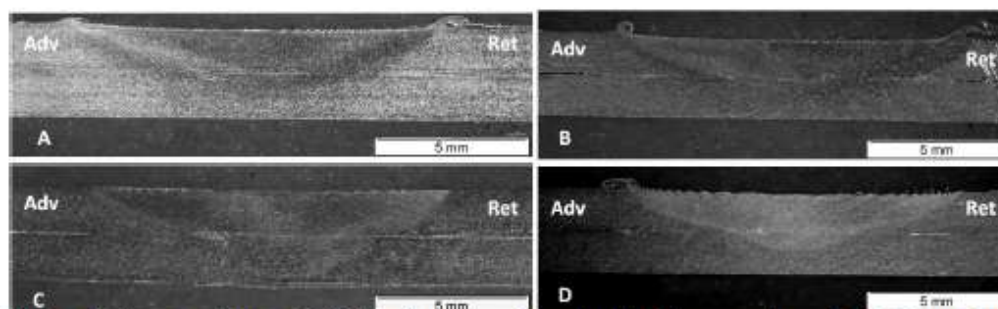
Cross-sections of FSW lap joints performed with (A) a non-threaded - 1,5 mm long probe tool at 1500 rpm – 150 mm/min; (B) a threaded - 1,5 mm long probe tool at 1500 rpm – 150 mm/min; (C) a non-threaded - 2 mm long probe tool at 750 rpm – 300 mm/min; and (D) a threaded - 2 mm long probe tool at 750 rpm – 300 mm/min.
